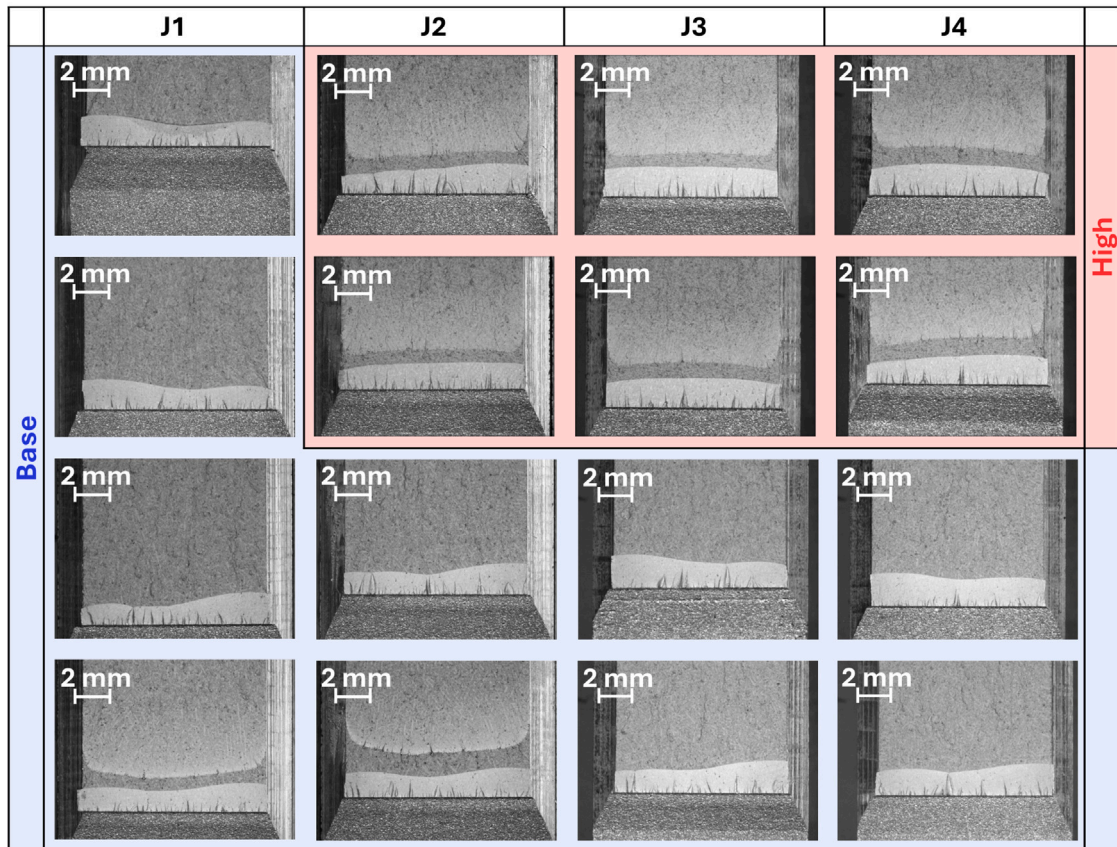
Fractographies of CT specimens for build jobs J1 to J4.
